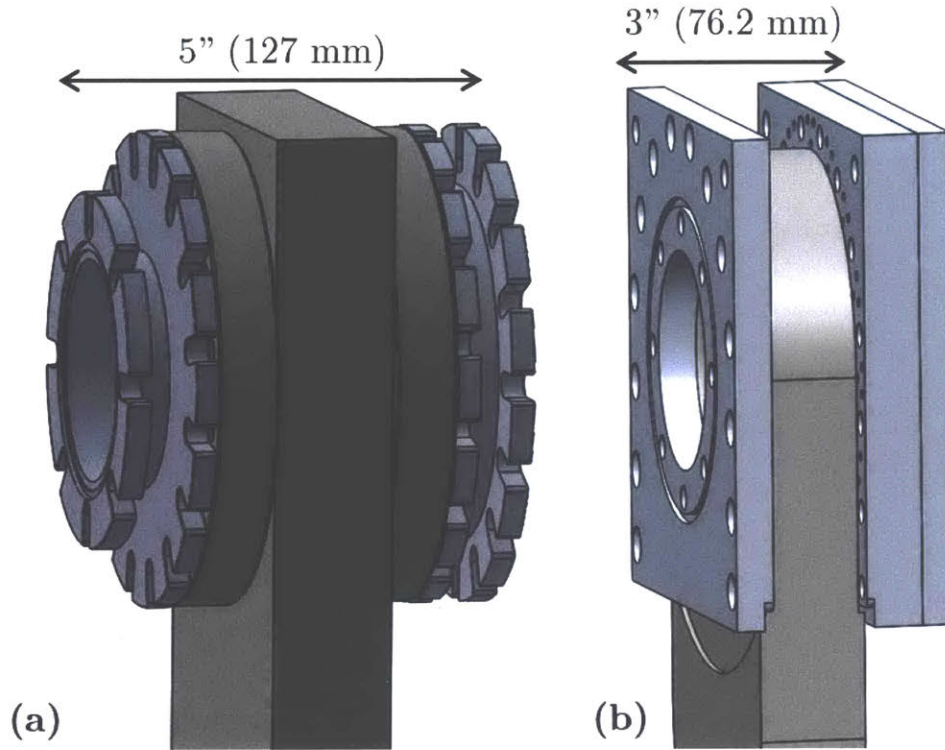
Comparison of (a) spider flanges used to connect CF 6" gate valve to LCA and LLA, and (b) the new, more compact insertable gate valve and plate flange design.
